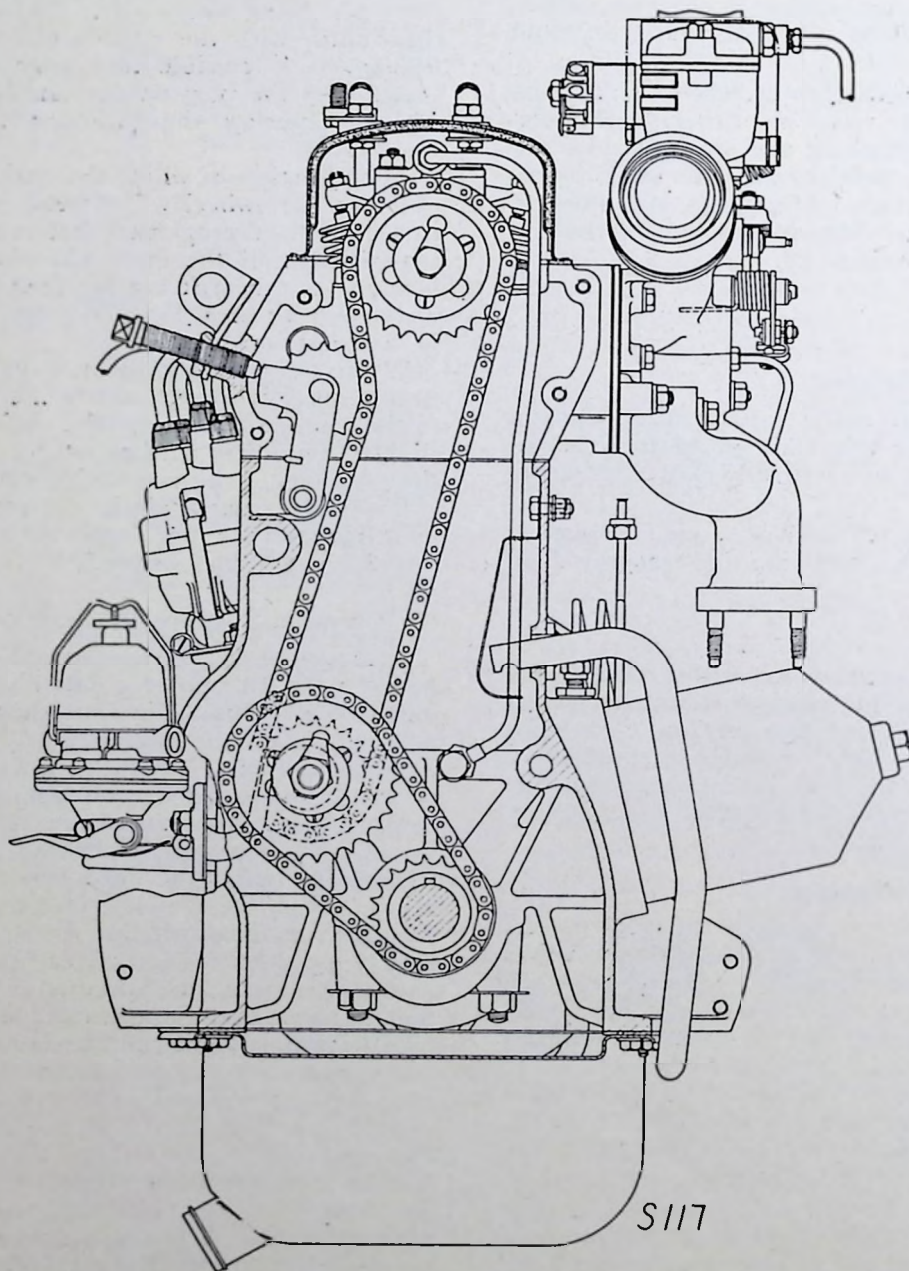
Layout of camshaft drive. (Series I-II.)
